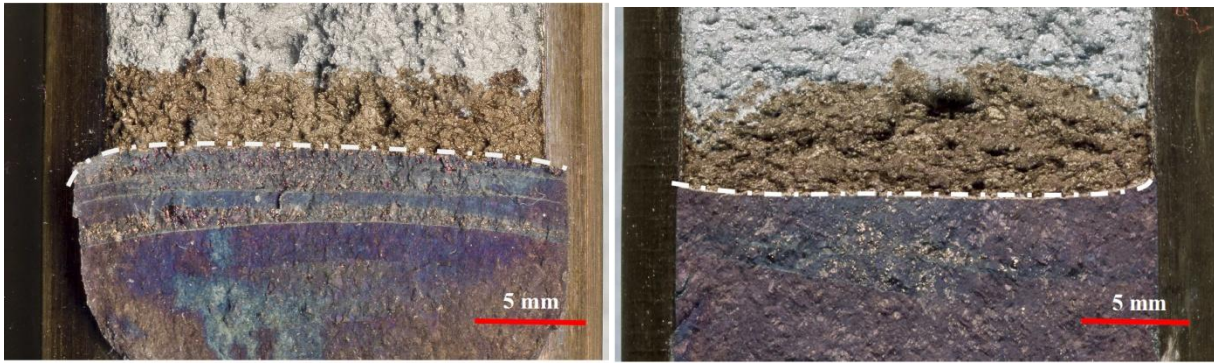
Fracture surfaces of specimens pre-cracked (a) before, and (b) after machining the side-grooves [81]
